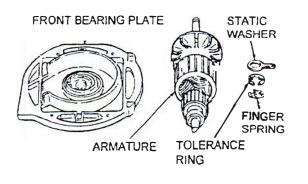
Front Bearing Plate, Armature Assembly, Static Washer, Tolerance Ring, and Finger Spring
